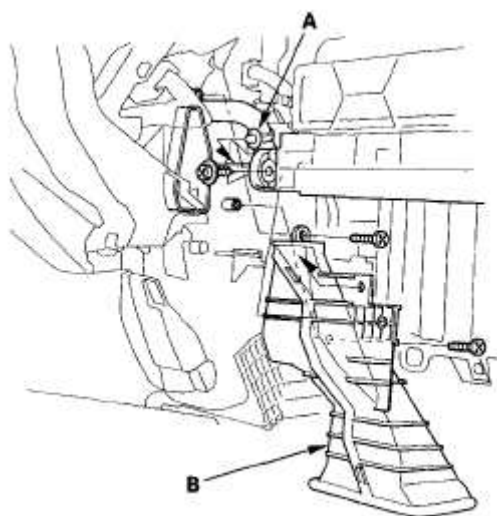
Identifying Wire Harness Clip And Passenger's Heater Duct
